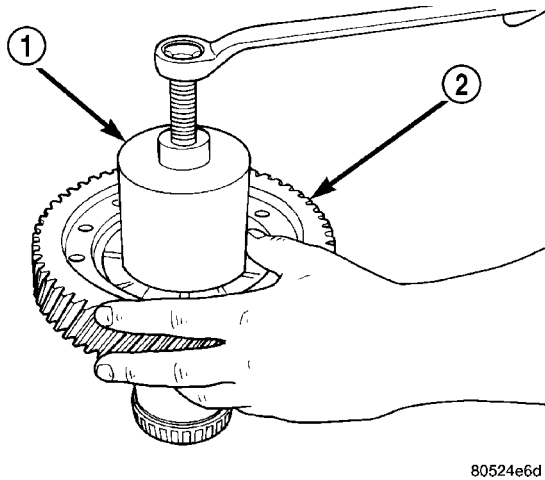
Position Tool 5048 Over Button and Collets at Differential Bearing (Ring Gear Side)
